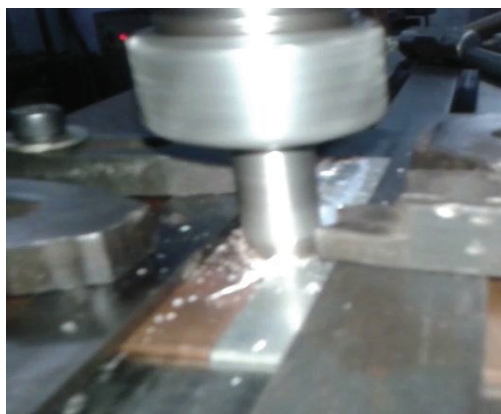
Butt joint configuration for two copper and Aluminum plates.
